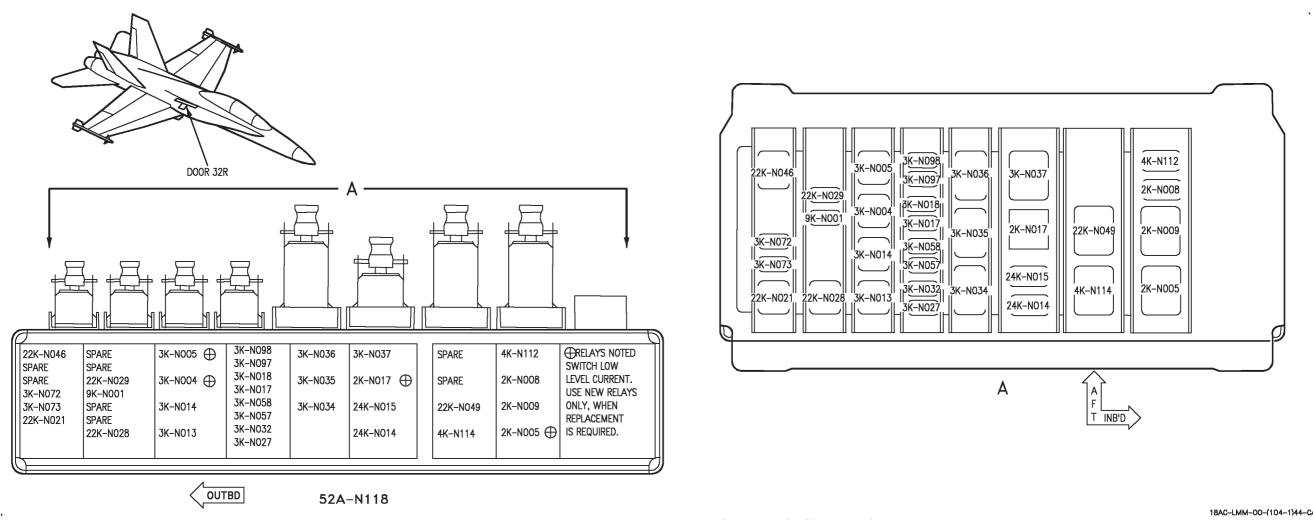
No. 4 Relay Panel Assembly - 52A-N118 (Sheet 1)
